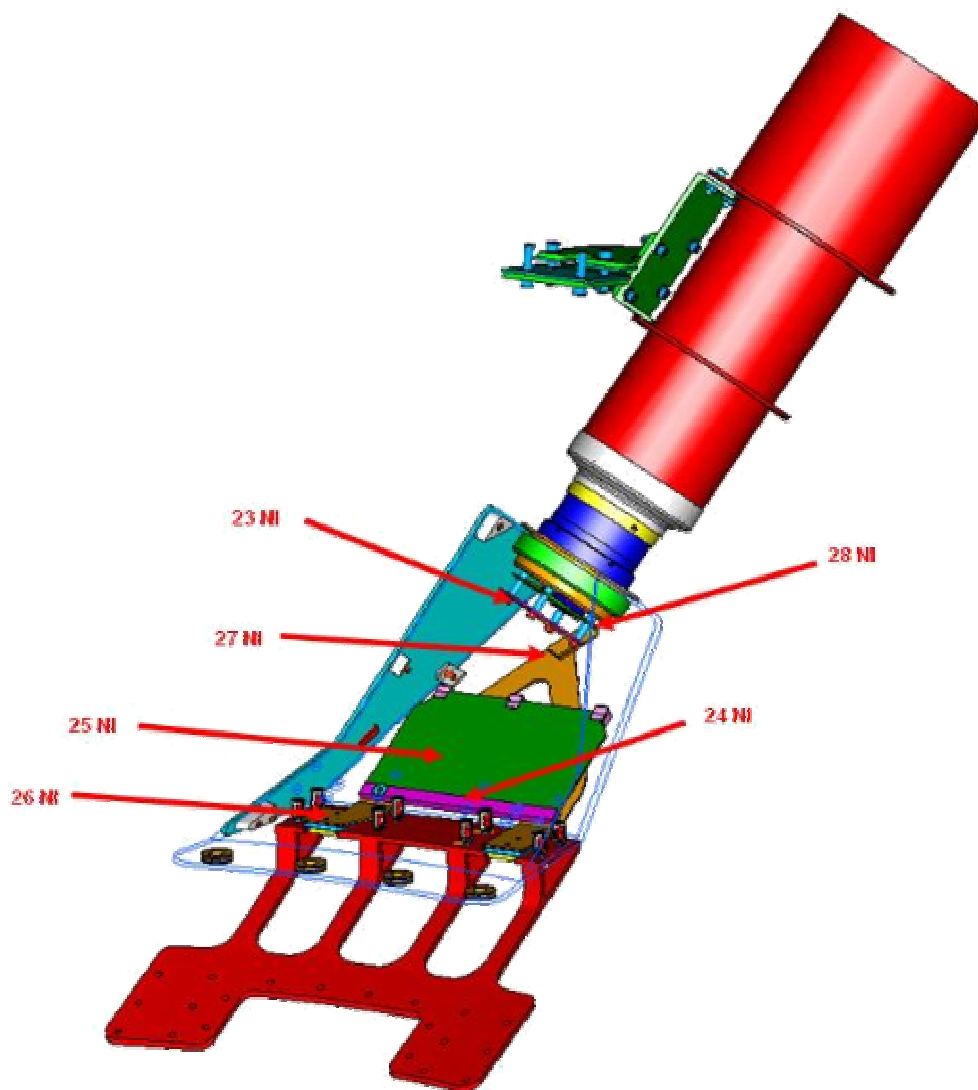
INTERNAL SENSORS LAYOUT.
